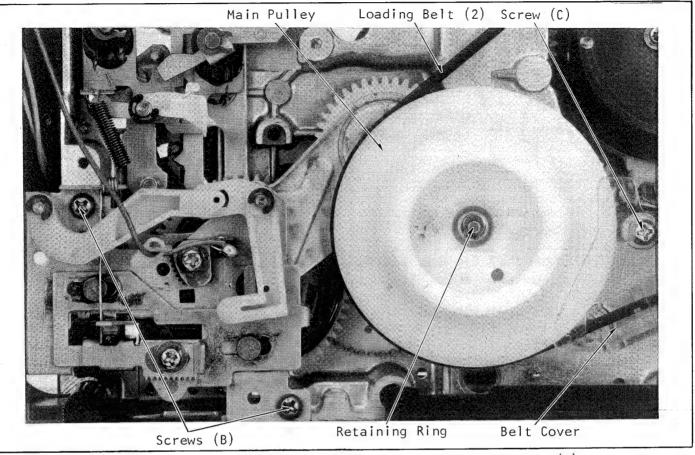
Adjustment of Cam Gear and Mode Select Switch - (9)
